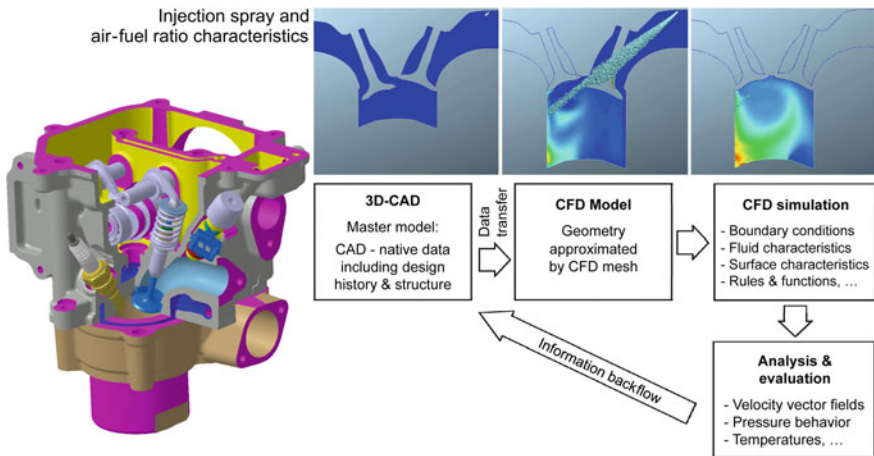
Cylinder head assembly and CFD simulation of a motorcycle engine
